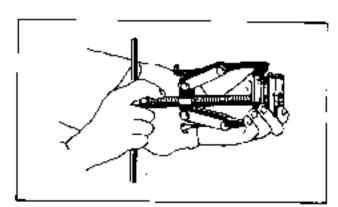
Clutch Cover Assembly (Coil Spring-Type)
